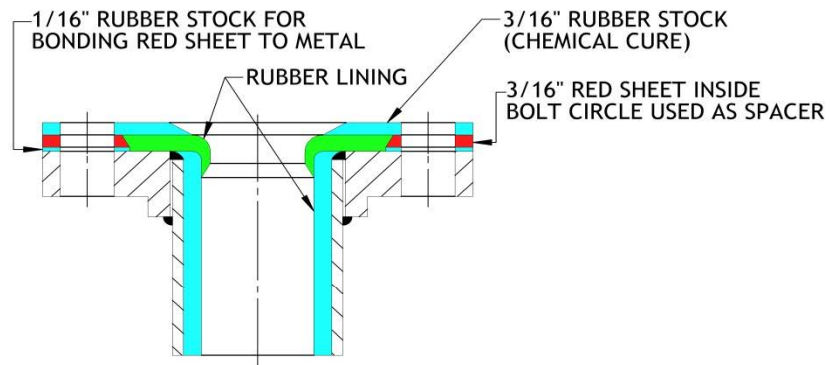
Internal steam cure vessel - Flange detail for outlets
